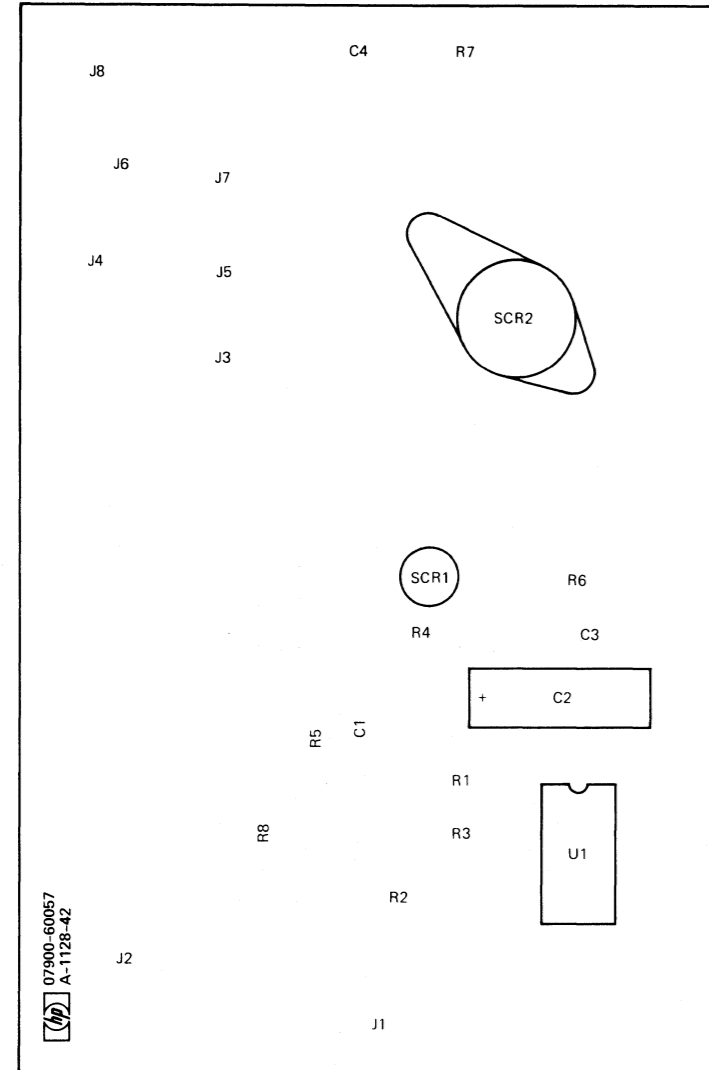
Motor Control Assembly A15 Parts Location Diagram
